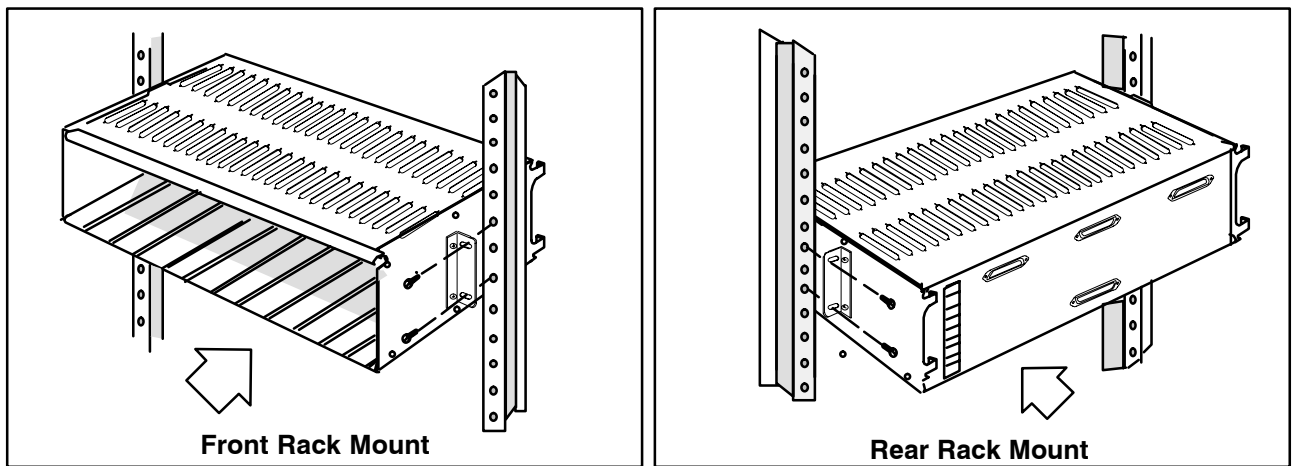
Equipment Horizontal Mounting — Rack Mounting
